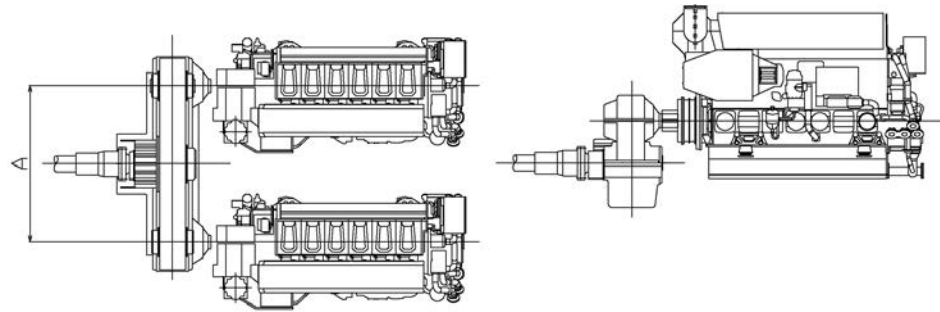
Crankshaft centre distances, in-line engines (DAAE026895A)
